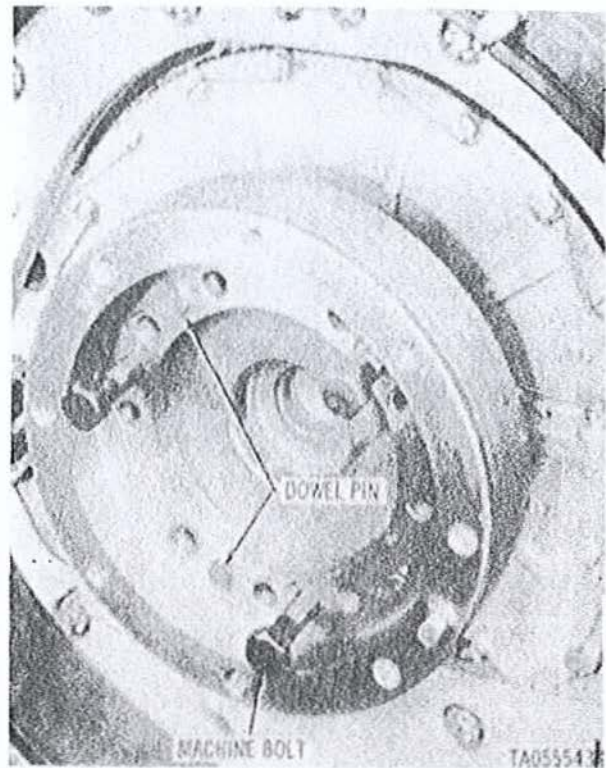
Removing flywheel adapter, model AVDS-1790-2DR engine.
